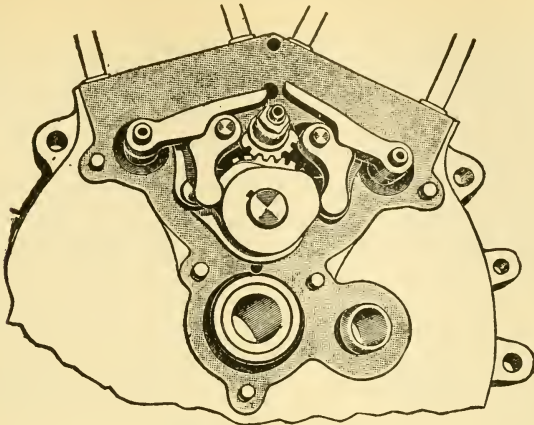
Valve gear of the Indian motor cycle. As shown in the illustration, the inlet valve of the front cylinder is about to close, while the exhaust valve of the rear cylinder has just opened. It will be seen that the revolving cam acts on the end of a cam lever, while the cam upon the lever lifts a second lever, or finger, upon which the lower end of the inlet valve operating rod rests. The exhaust valve is operated in the same way, but the levers are of slightly different form, and the end of the cam lever is provided with a steel roller to lessen the friction with the revolving cam, as the power required to operate the exhaust valve is greater than that required for the inlet valve.
